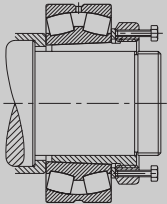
Dismounting of Withdrawal Sleeve by using Bolts
